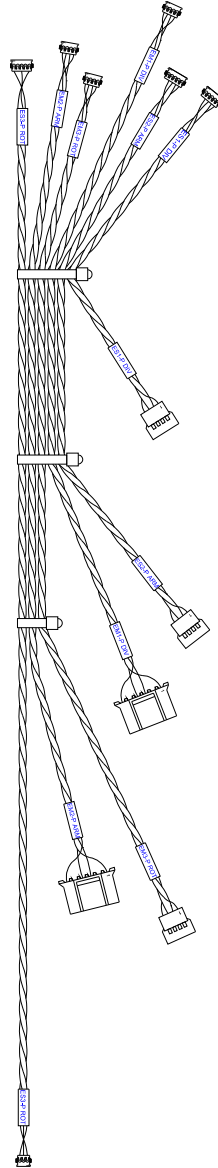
VL4000 Optics Bulkhead 2 Cable Assembly
